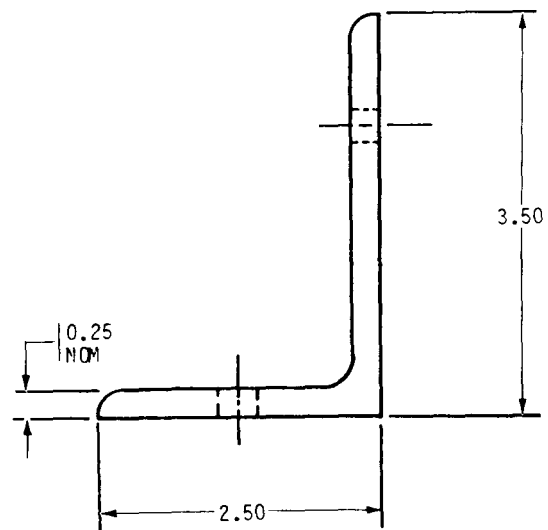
Dimensions for Bracket-7551851, Unit 1, 280.
